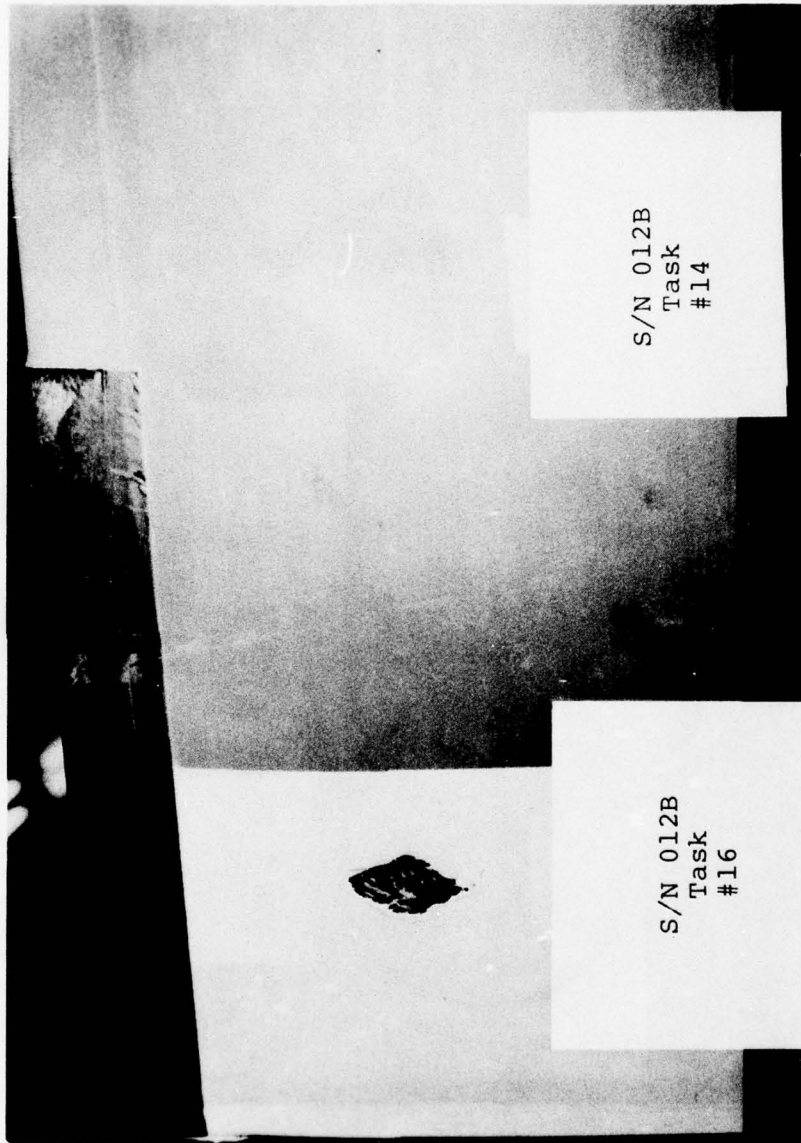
Damaged flight blade specimen, blade punctured and dented.
